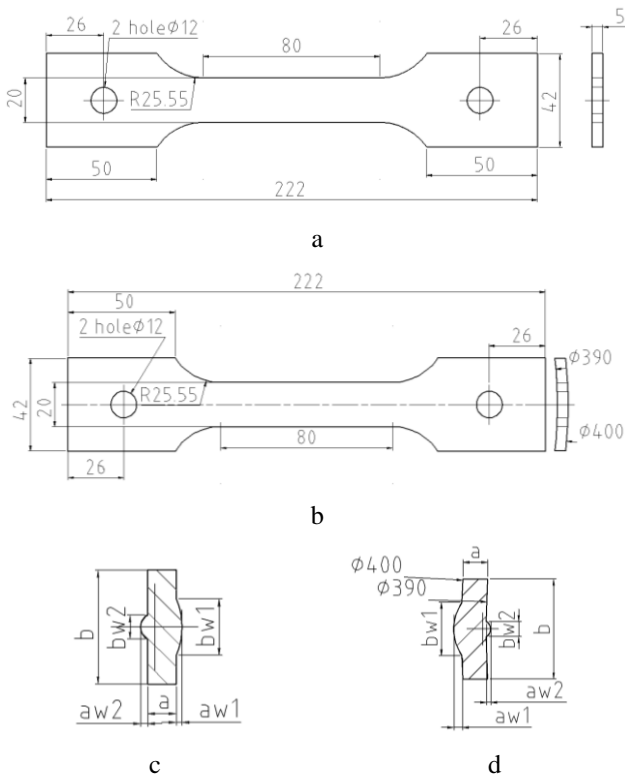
Shape and measurements of the specimens: a - standard flat specimen (series P); b - tube contoured specimen (series T); c - weld cross-section of the flat specimen (series PW); d - weld cross-section of the tube contoured specimen (series TW)
